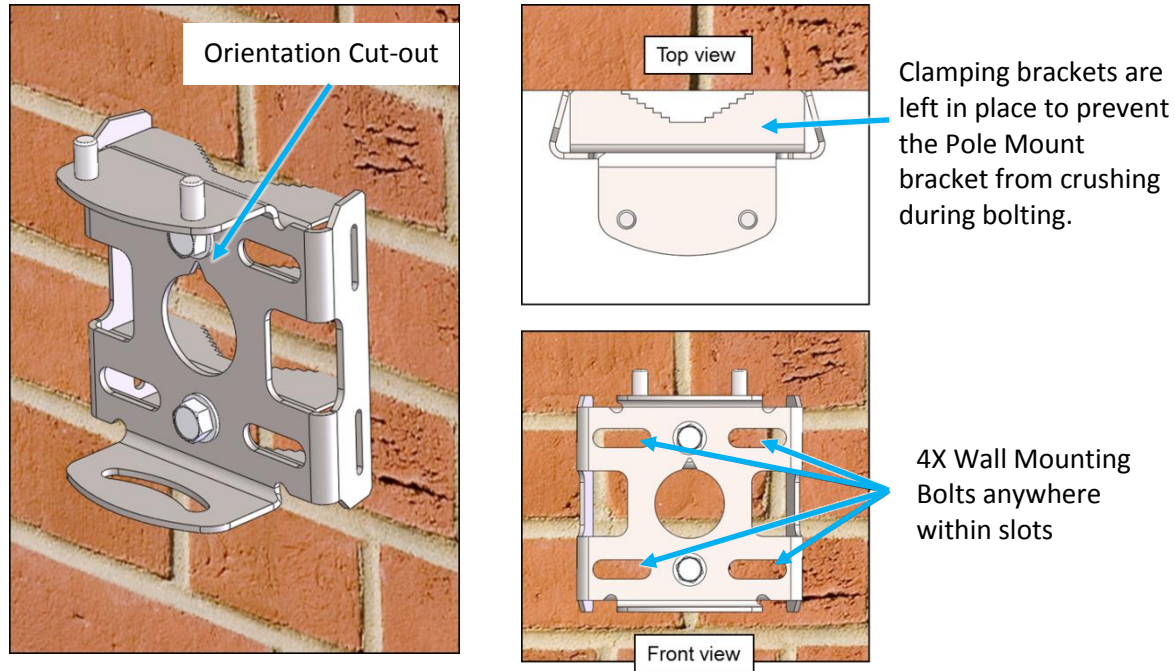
Attaching Assembled Pole/Wall Mount Bracket to Wall
